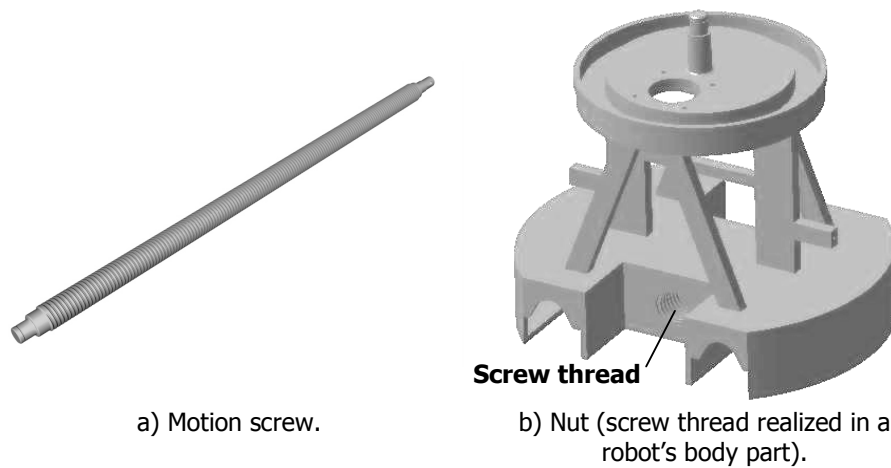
3D models of the motion screw - nut mechanical transmission parts.
